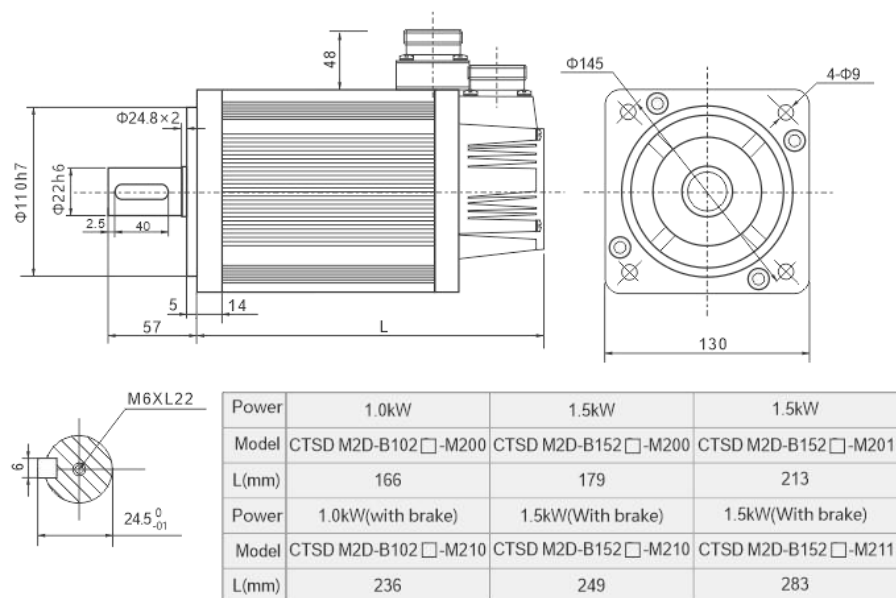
Motor dimension of 1.0kW/1.5kW
